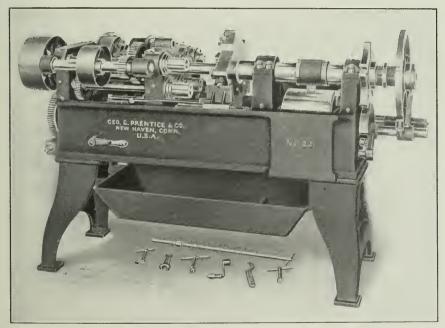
Prentice Multiple-Spindle Automatic Turret Machine
